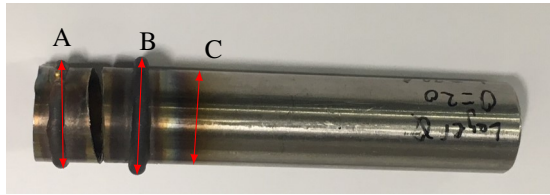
Welding trials performed in a 20 mm tube where: a) is the first layer of the AM with an outside diameter of 22.5 mm and b) is the second layer of the AM with an outside diameter of 25mm.
